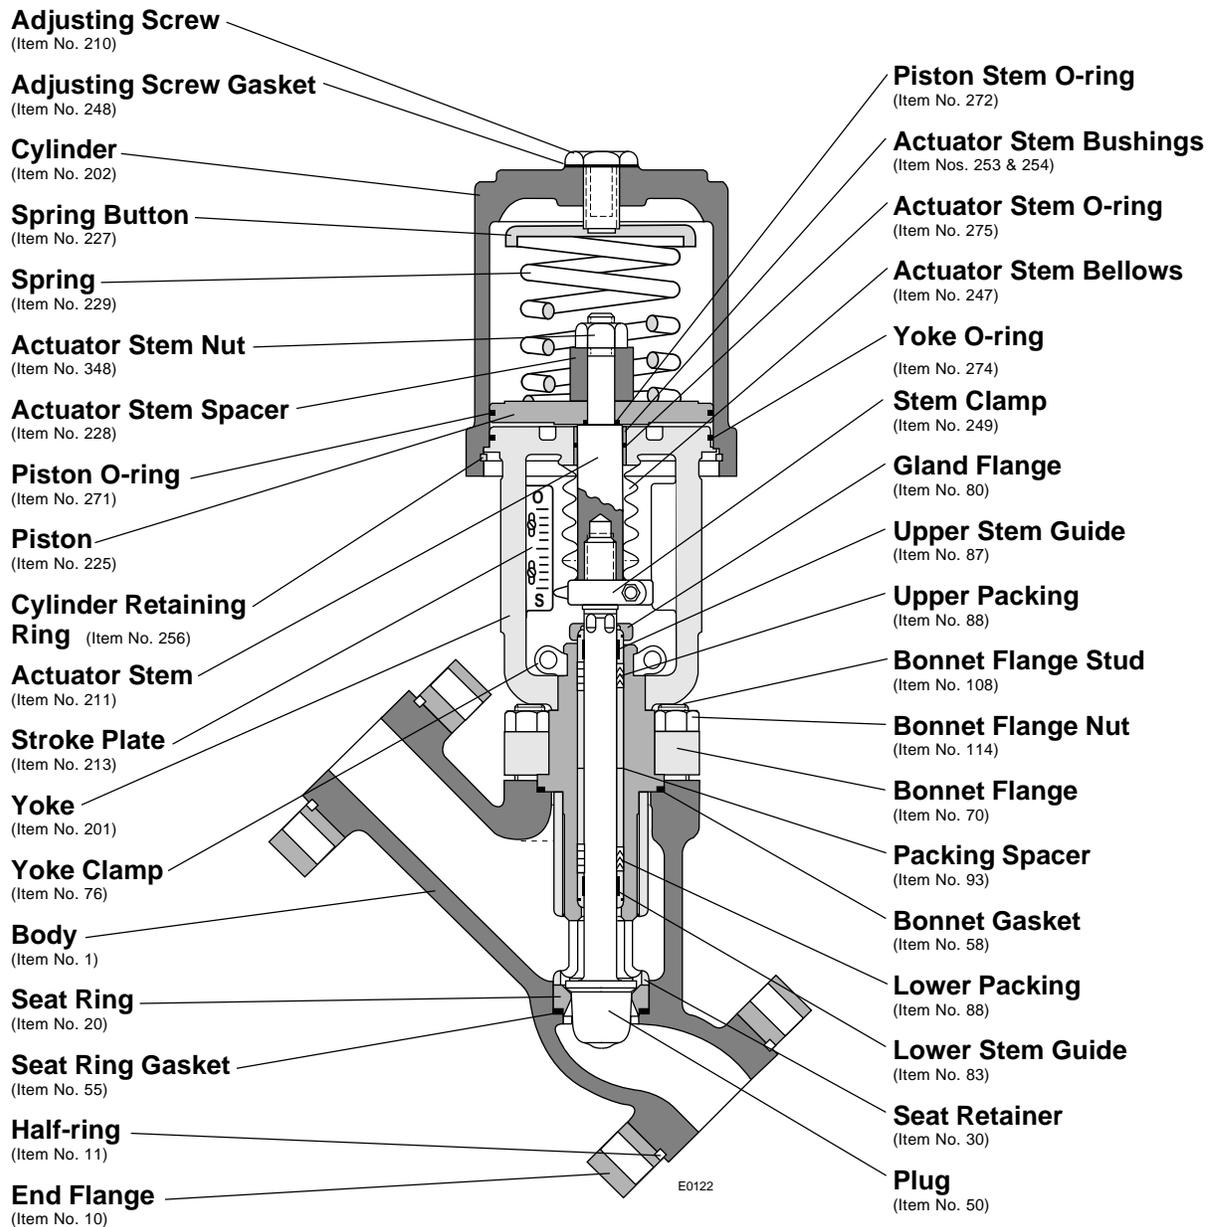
Sectioned View of Standard Mark Eight Control Valve
